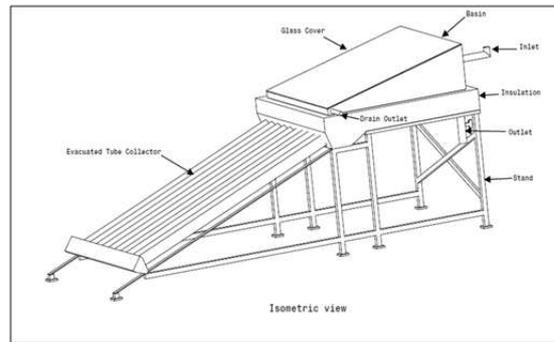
Solar Still Coupled With Evacuated Tube Collector
